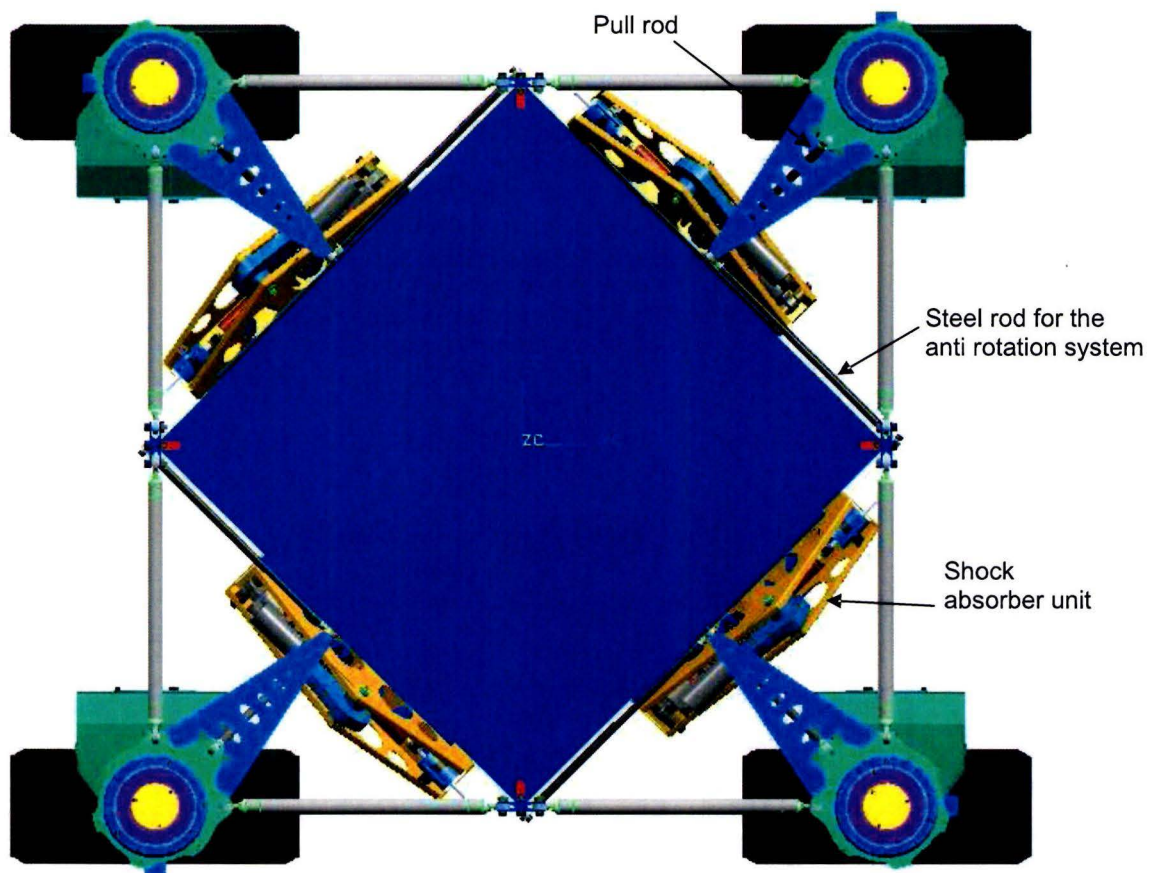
Total vehicle, but without the parts mounted in the frame; Top view
